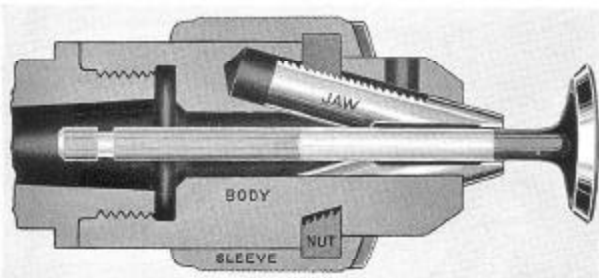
Cross Section Showing Construction of 3-Jaw Precision Valve Chuck Threaded to Spindle Nose of Lathe. This chuck handles valves with stems up to  $\frac{3}{8}$ -in. in diameter.
